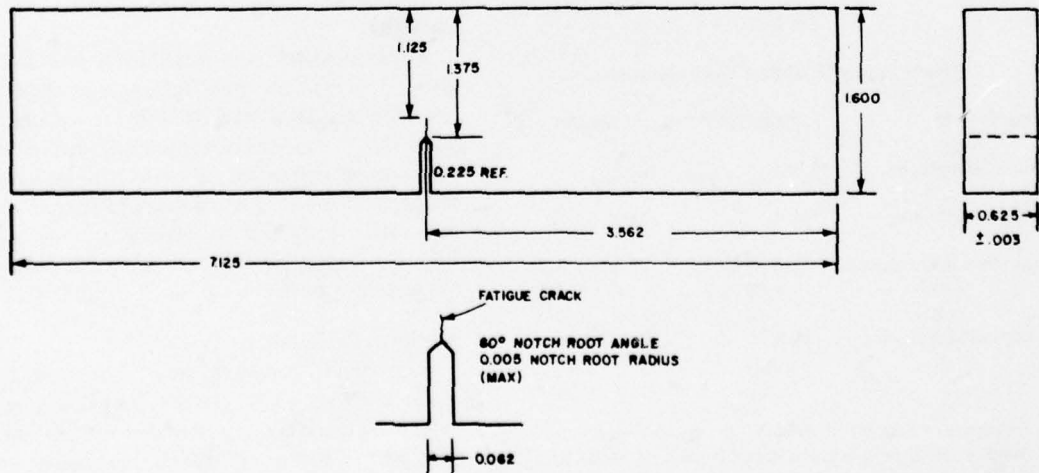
Fatigue precracked specimen having the same notch length as the standard specimen. (All dimensions are in inches; metric conversion factor: 1 in. = 2.54 cm.)
